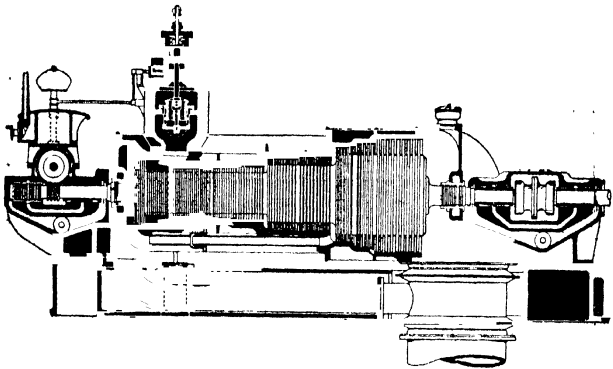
LONGITUDINAL SECTION OF A BRUSH-PARSONS STEAM TURBINE.
